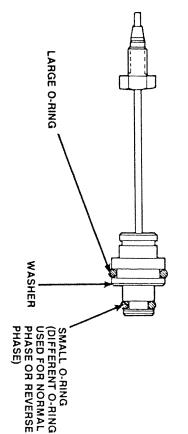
RCM 8  $\times$  10 MODULE STAINLESS STEEL CONNECTOR ASSEMBLY (The black cap and E-ring are not shown in the diagram.)
